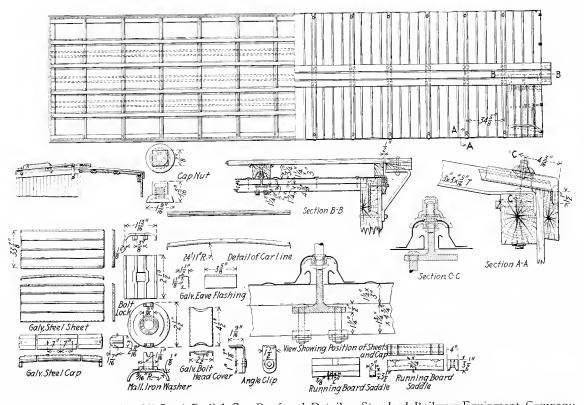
New Murphy All-Steel Radial Car Roof and Details. Standard Railway Equipment Company.
